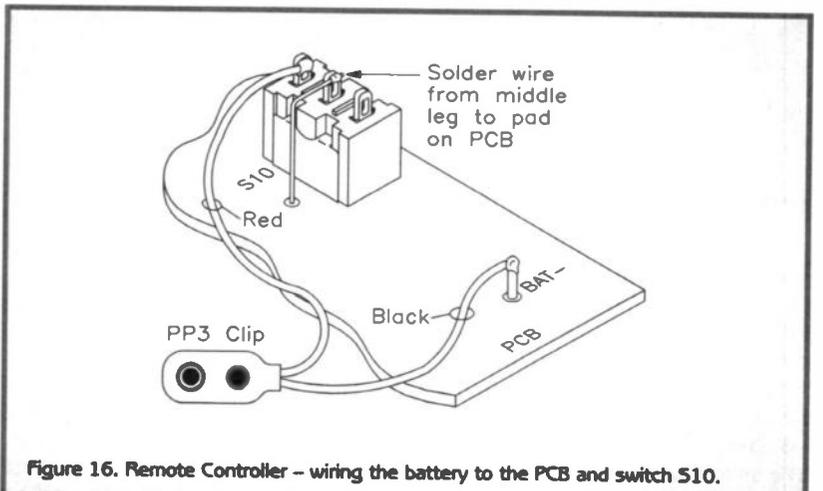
Remote Controller - wiring the battery to the PCB and switch S10.
